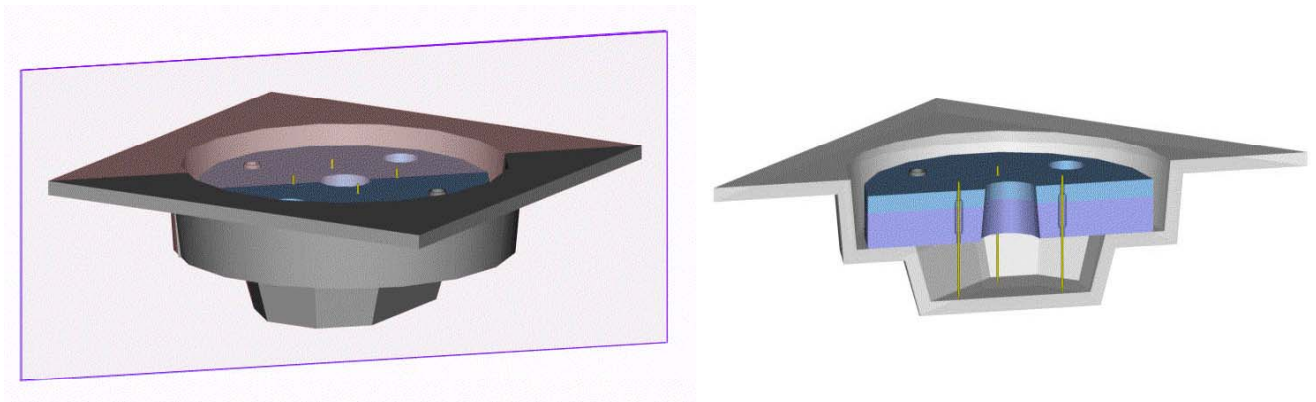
Isometric and sectional view of pin registration fixture. Fixture has a diameter of 26 mm.
